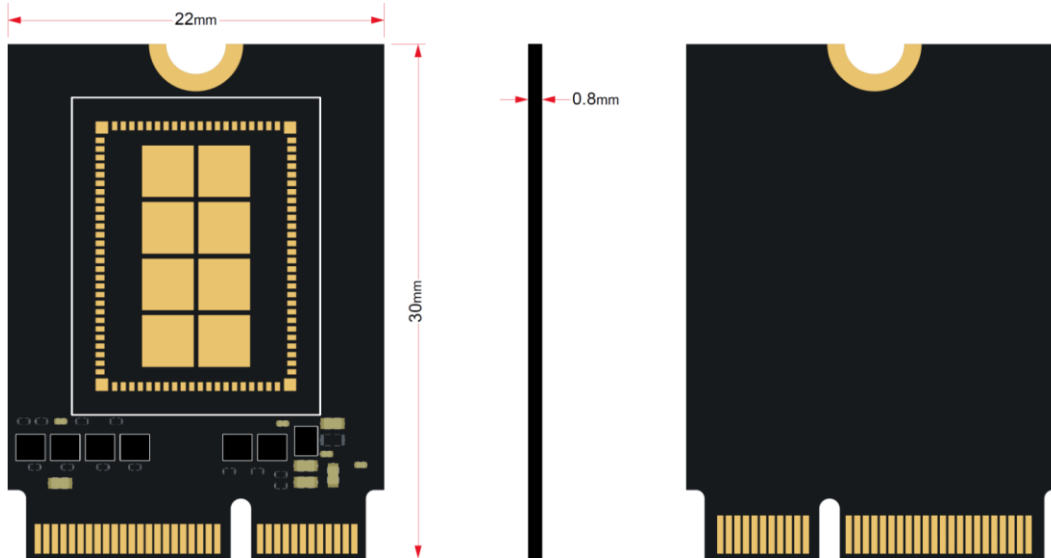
M.2 Soldered-down Type 1216 to M.2 Key E 2230 Carrier Board
